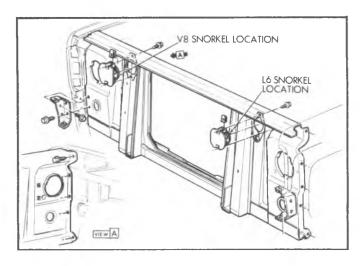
Carburetor Outside Air Inlet Snorkels—CK Series
